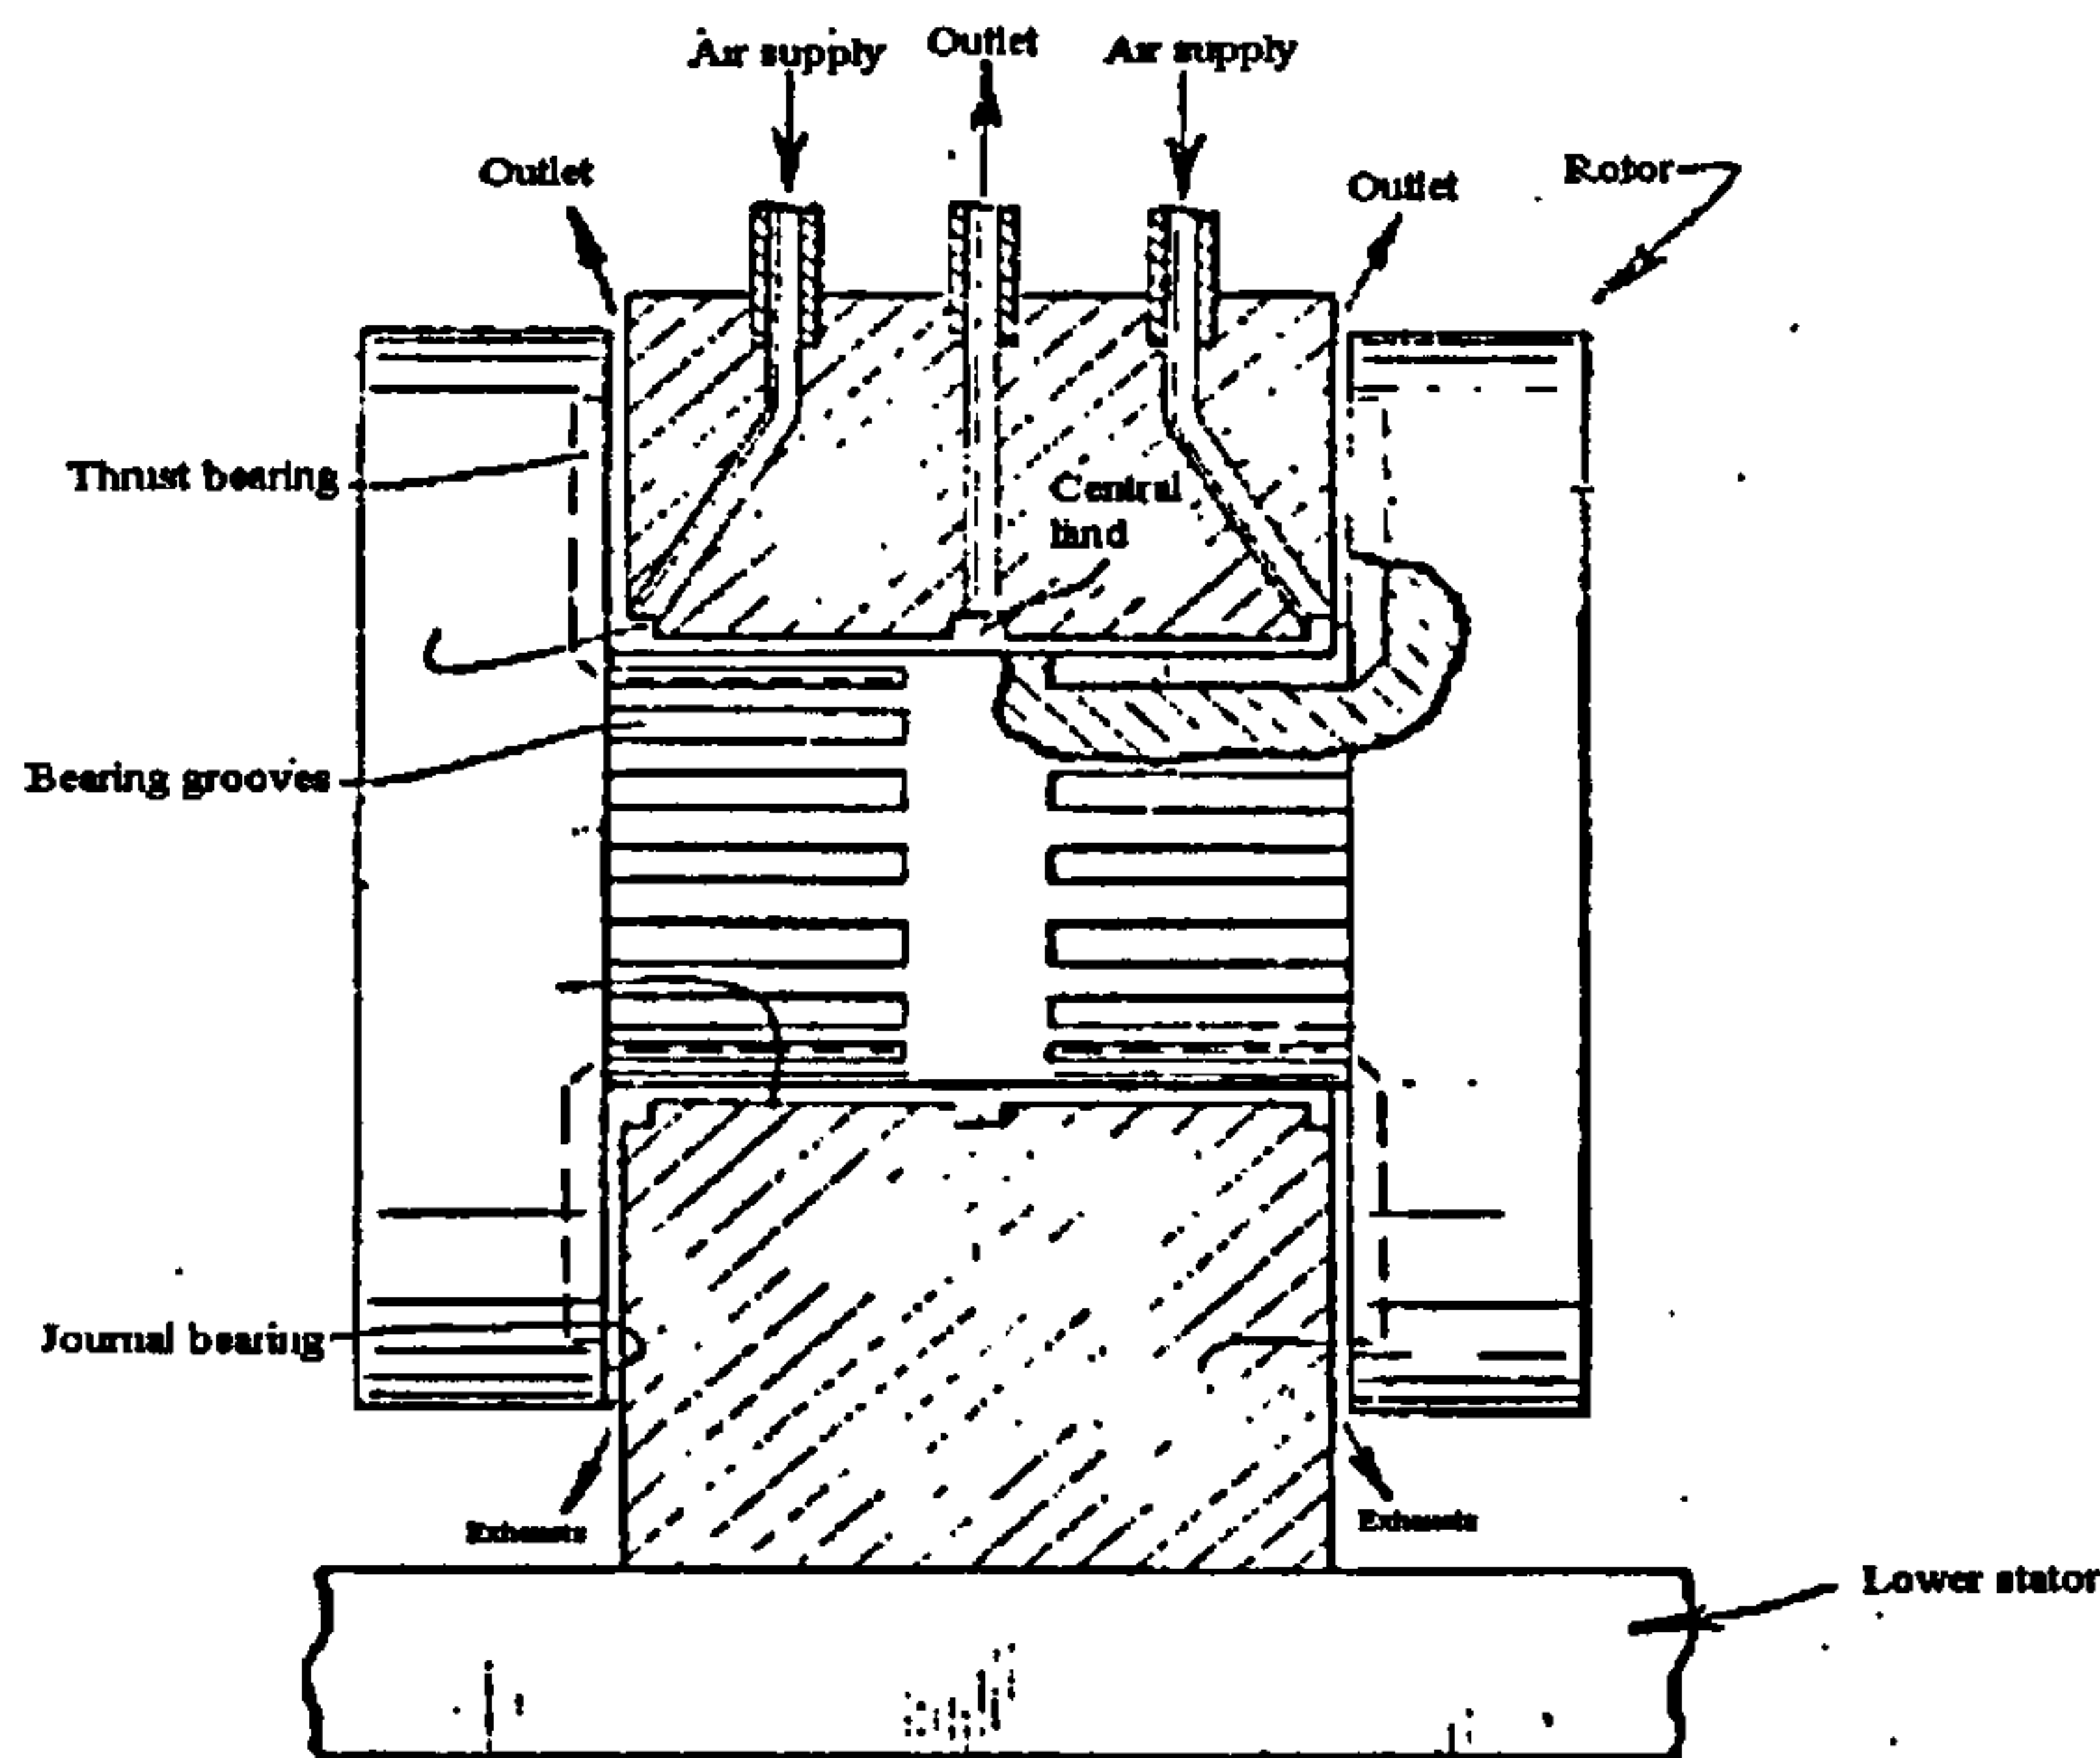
Sectioned view of the PI bearing (after Arneson, 1969)
